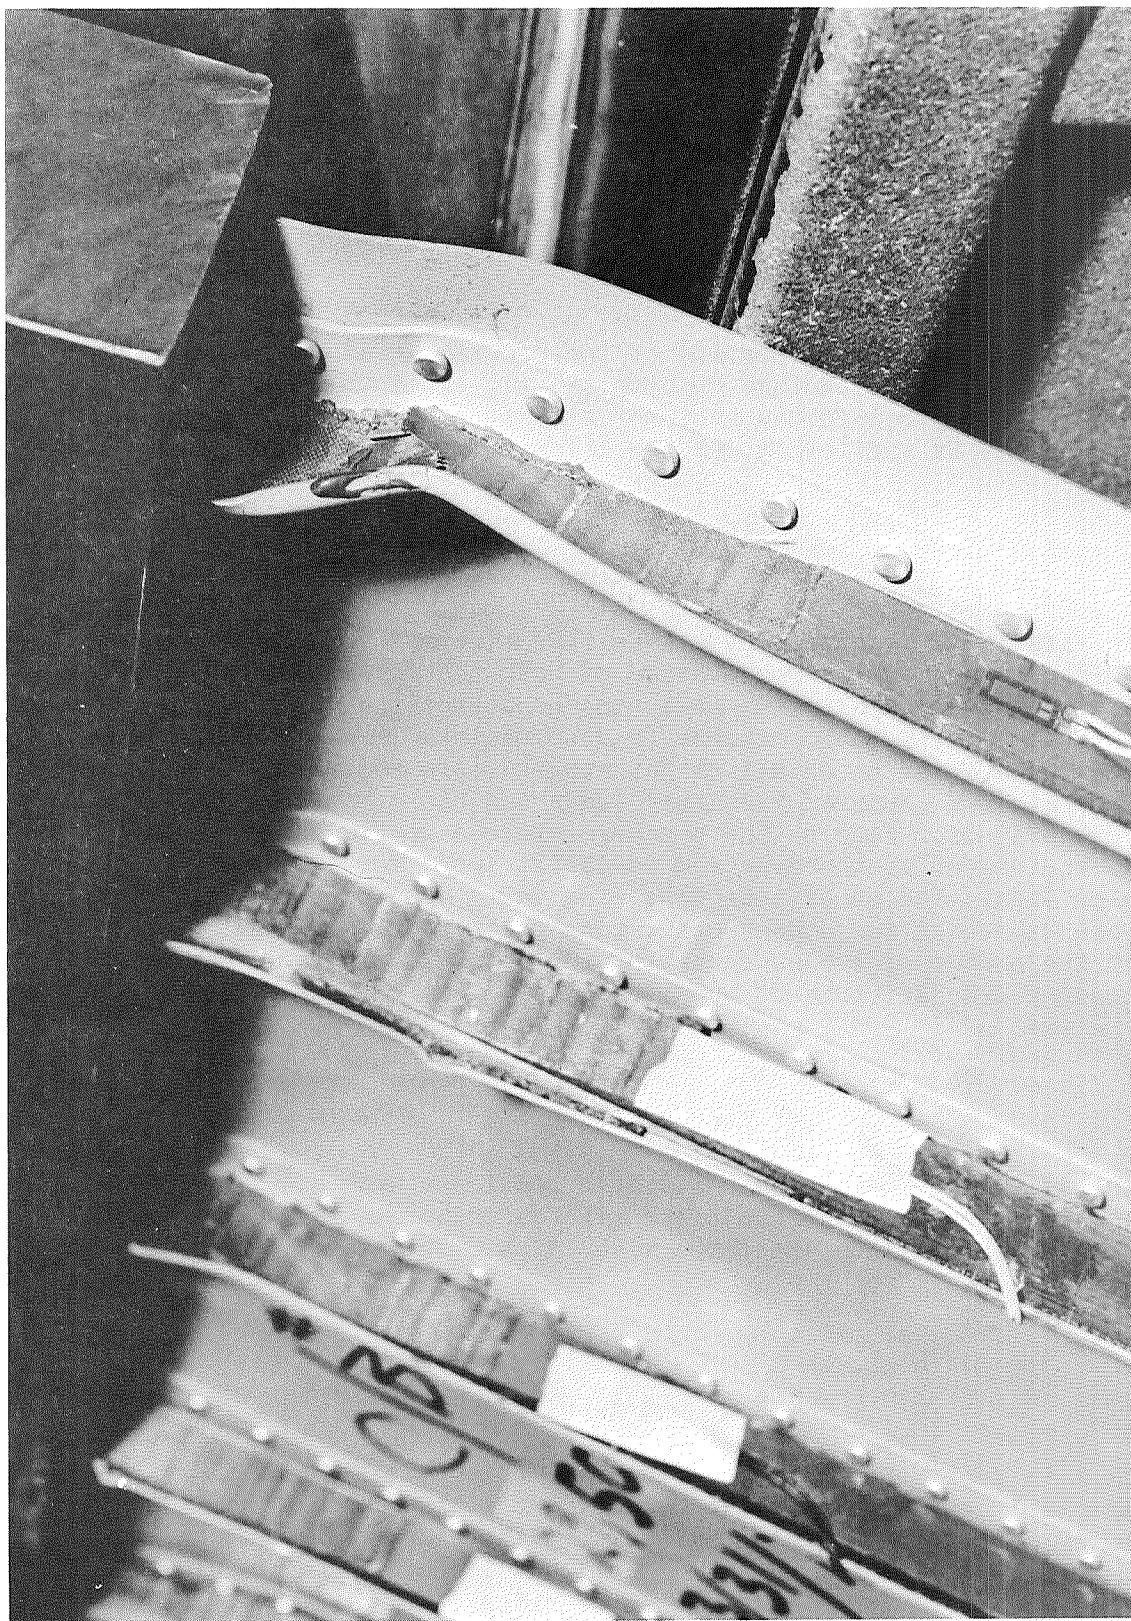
DETAIL OF COMPRESSION FAILURE OF BORON/EPOXY REINFORCED STRINGER TEST PANEL.
